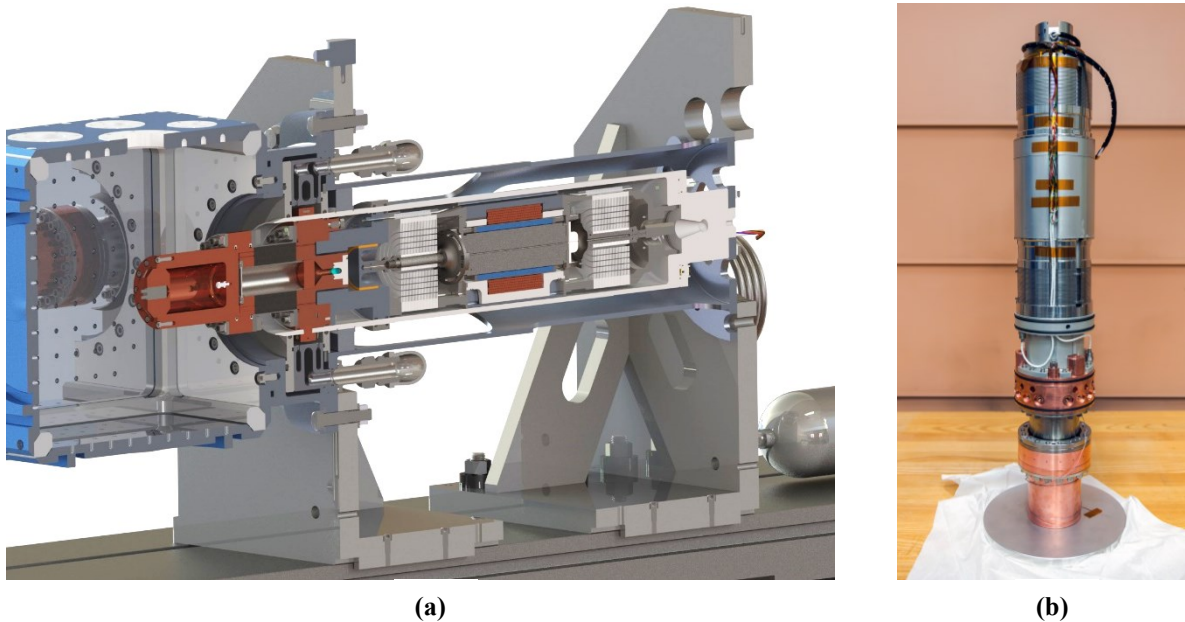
(a) Cross section of the cryocooler installed in the test stand with cooling system and vacuum chamber. (b) Photograph of the assembled cryocooler before installation into the shaft.
